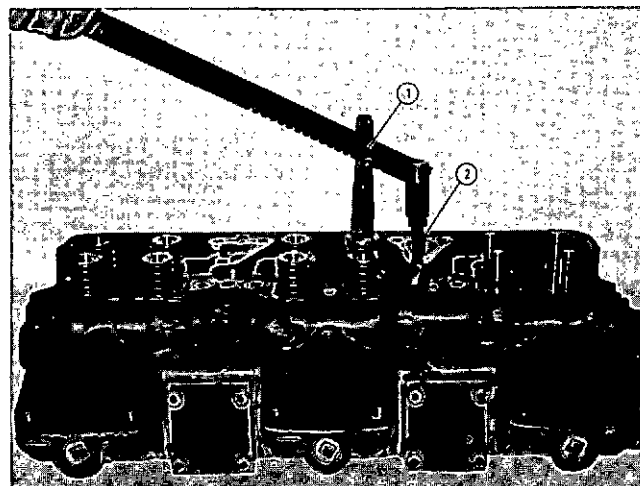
, V40201. Compressing valve springs with ST-448
